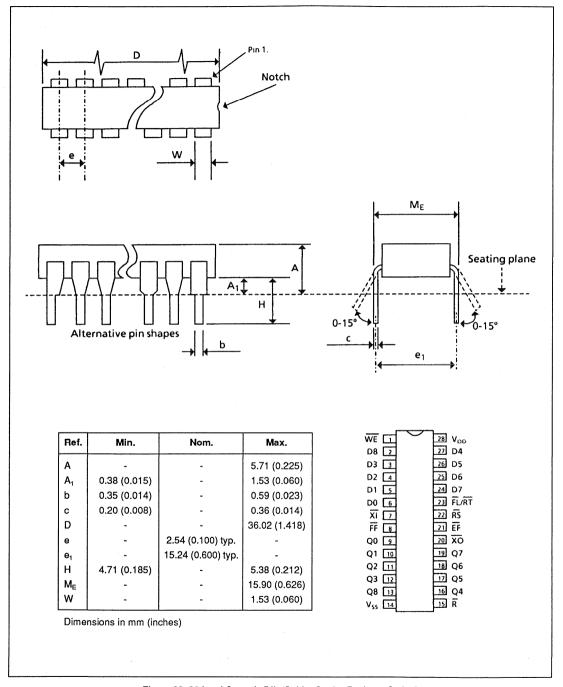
28 Lead Ceramic DIL (Solder Seal) - Package Style C
